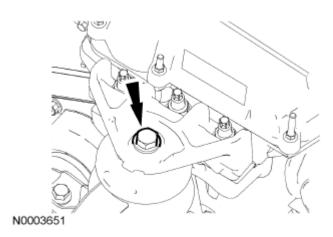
Locating Engine Mount Bracket Bolt Courtesy of FORD MOTOR CO.
